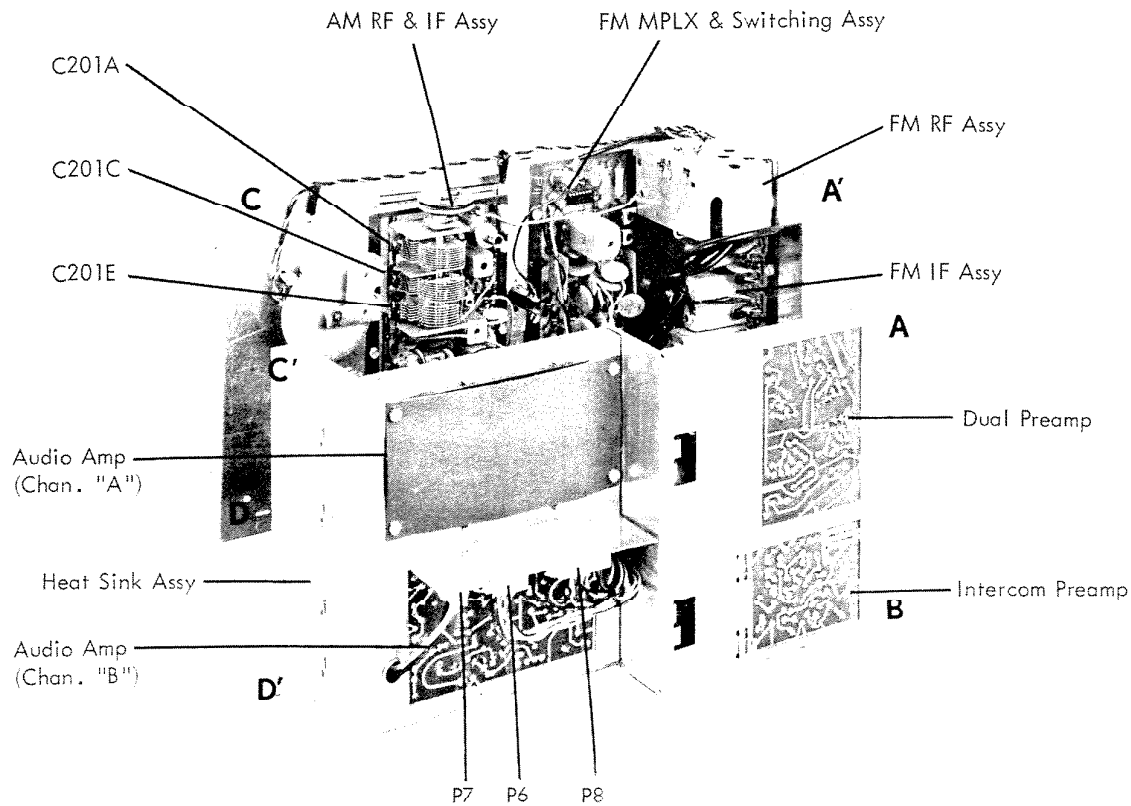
REAR VIEW FRONT AND REAR RECEIVER CHASSIS SEPARATED
